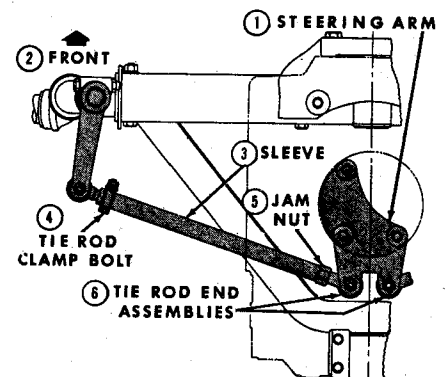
When checking toe-in on row crop wide adjustable axle, be sure steering arm is centered as shown. View is from top. When installing center steering arm, be sure steering motor is centered and install arm as shown.
